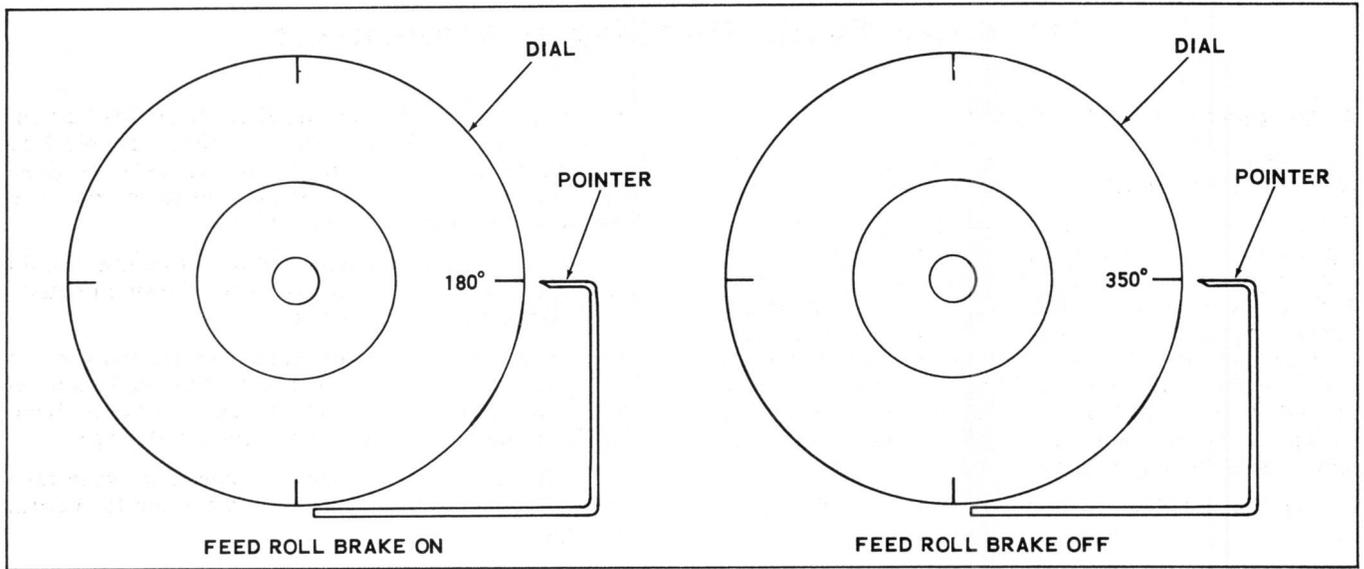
Setting Feed Roll Brake Switch LSR-1
